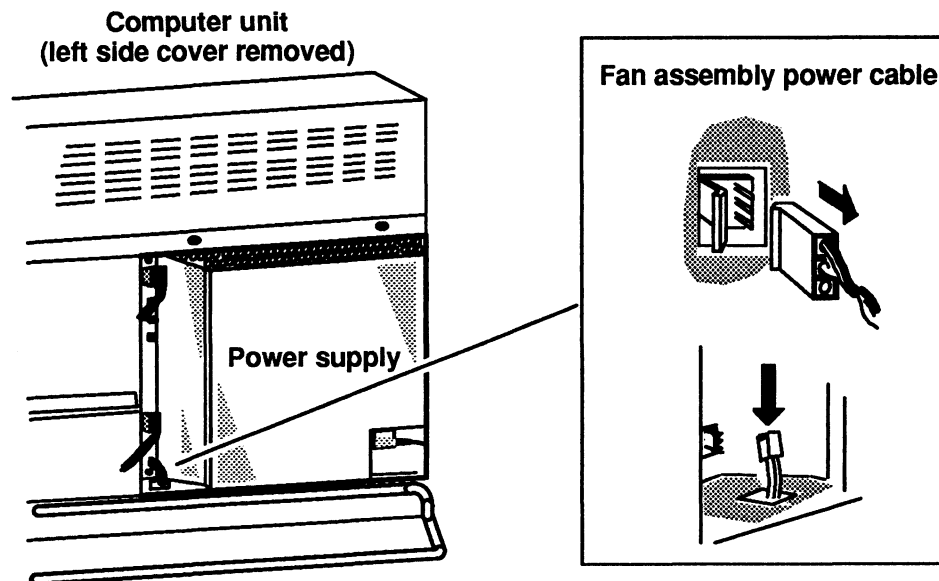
Unplugging the Fan Assembly Power Cable from the Power Supply
